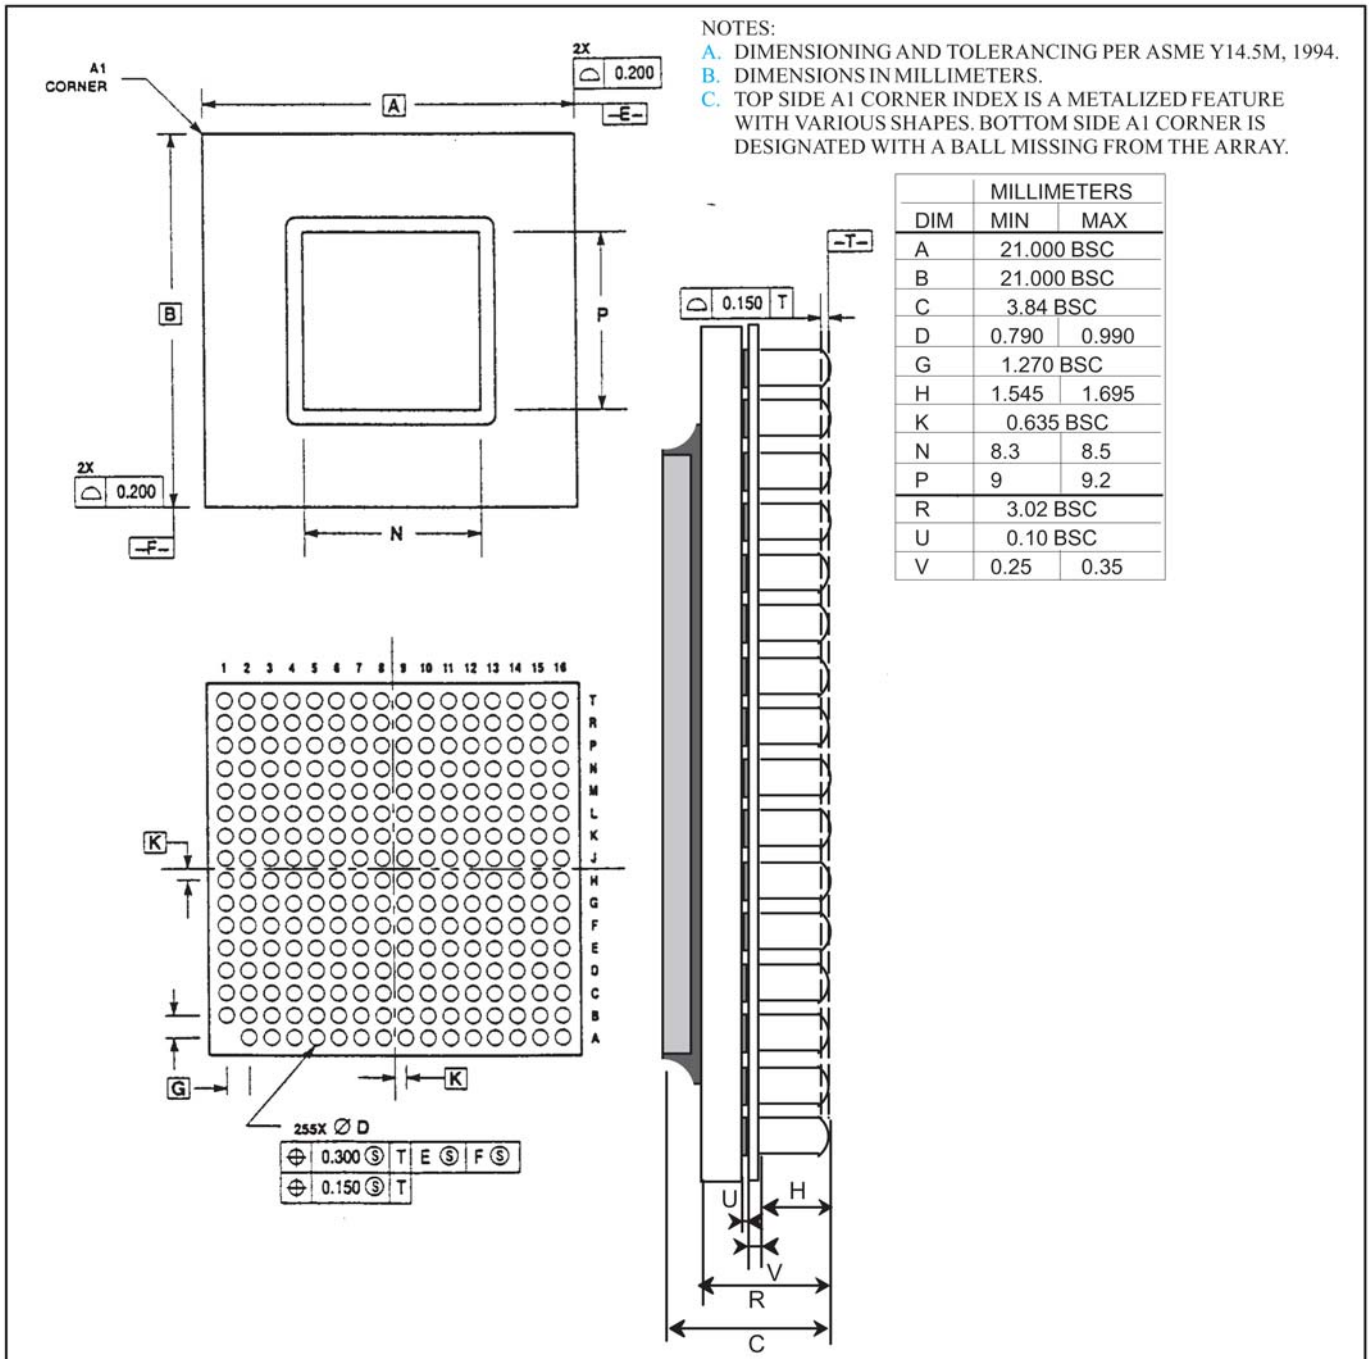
Mechanical Dimensions and Bottom Surface Nomenclature of TSPC740A (CBGA)
